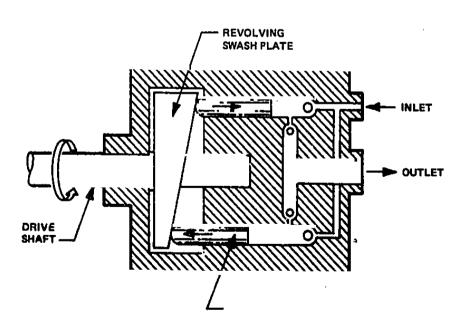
In-Line, Check-Valve, Axial-Piston Pump
